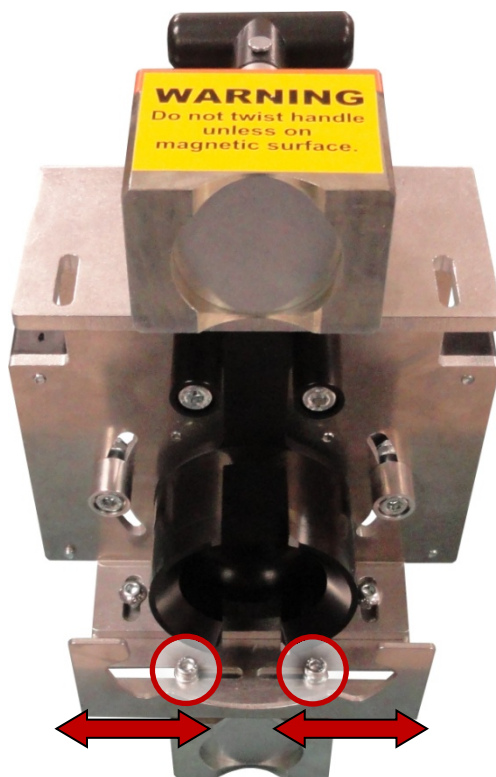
Side to side magnet adjustment on the top side of the RSA-34
